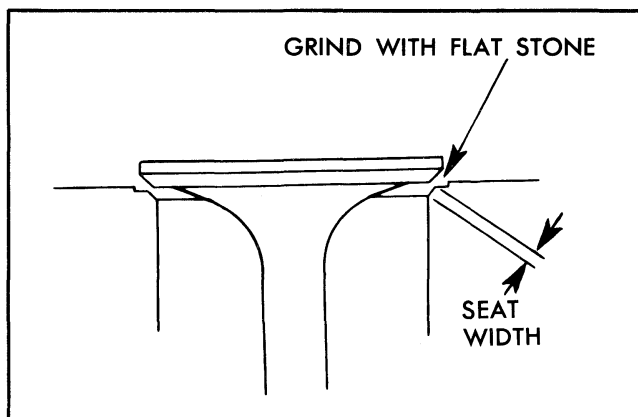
Valve Seat After Grinding With Flat Stone
